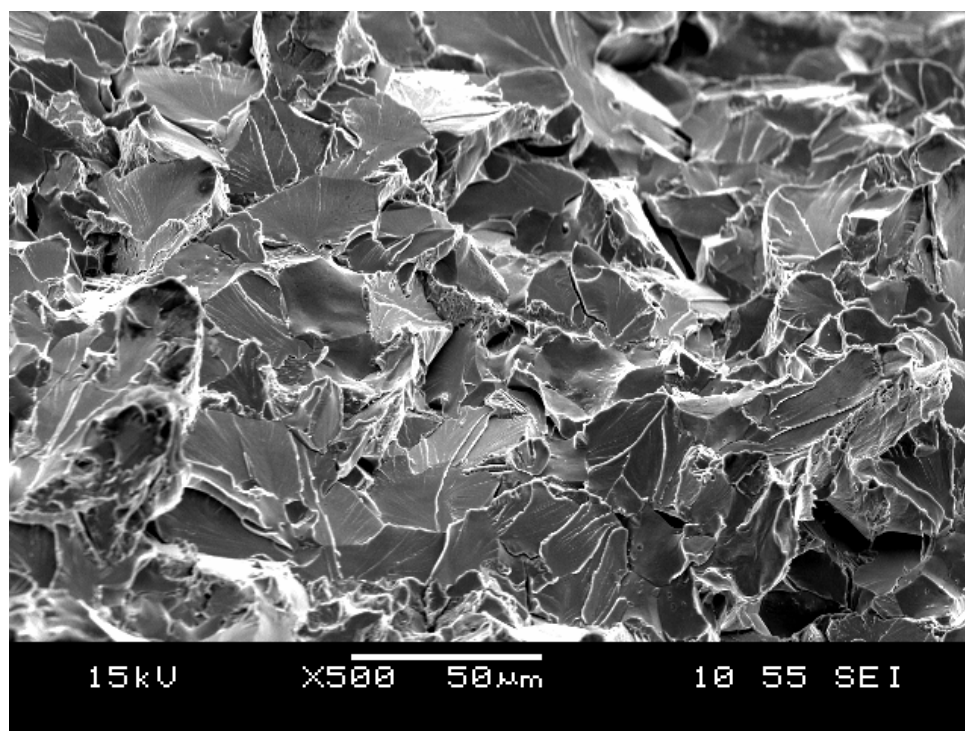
SEM image of the shinier final fracture region of one of the parent material Charpy impact samples, with a typical cleavage fracture appearance indicative of a brittle fracture mode.
